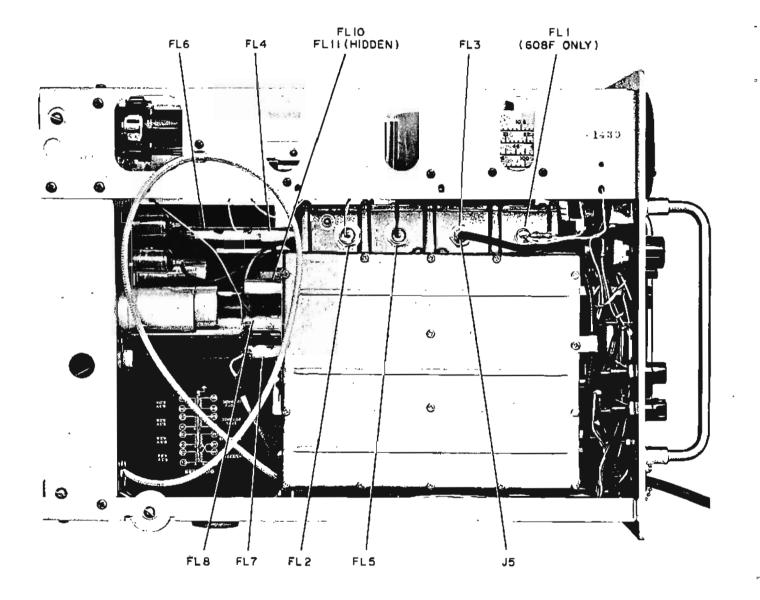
Left Side View Showing Location of Unlabeled Components
